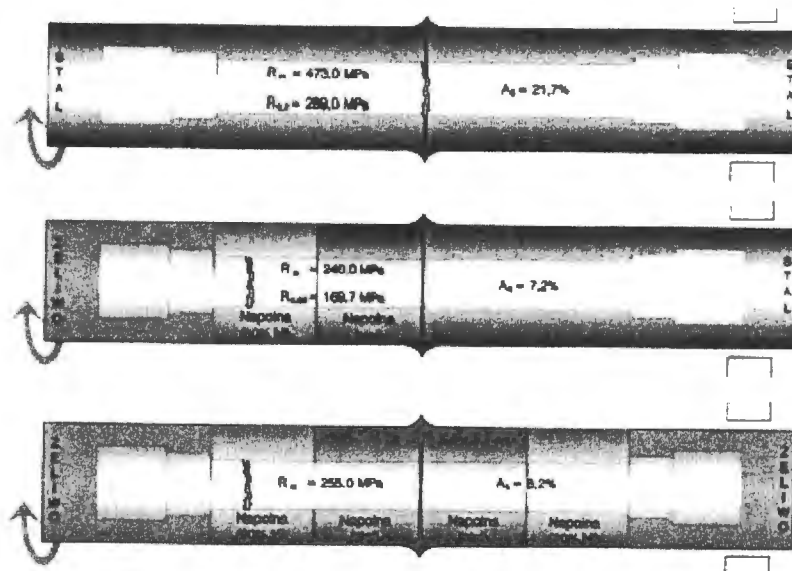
Mechanical and plastic properties of a joint of the type: cast iron (50.0% Ni weld overlay + 99.5% Cu weld overlay) + (99.5% Cu weld overlay + 50.0% Ni weld overlay) cast iron.
